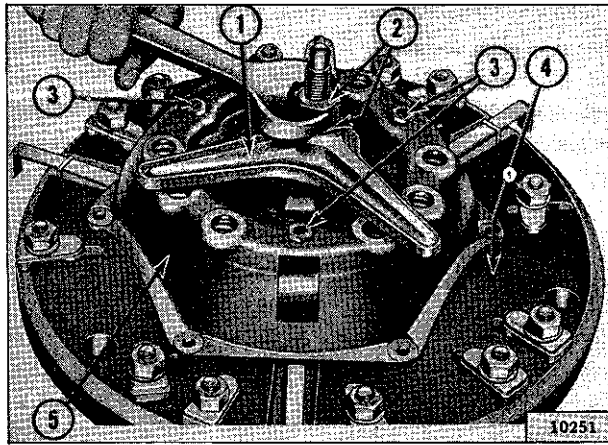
DISASSEMBLING BORG AND BECK CLUTCH
